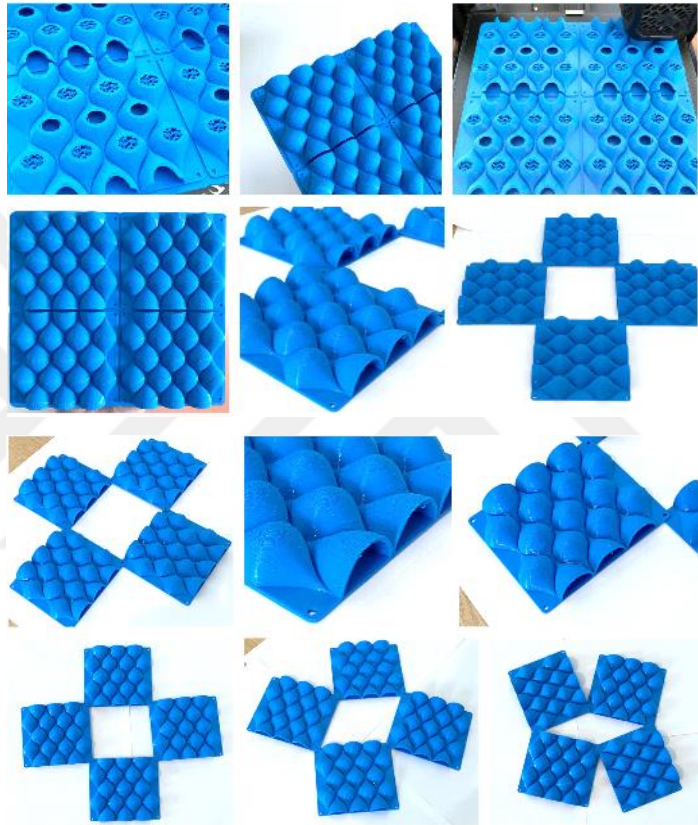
3D-printed PLA prototype set composed of 4 tiles.
